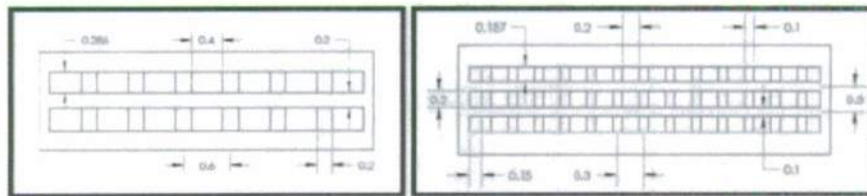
Grid #1 and #2 dimensions (inches, left-to-right)
